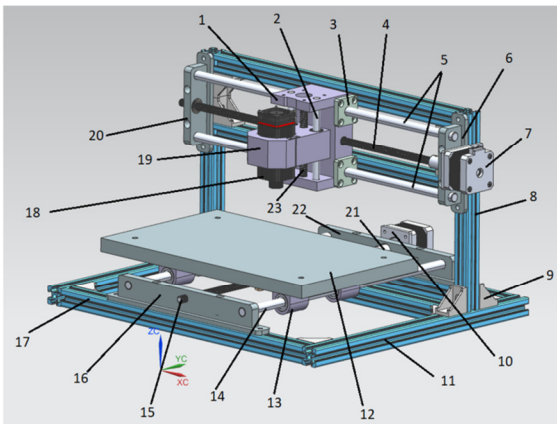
Main parts of laser cutting machine. (1) Laser hoder, (2) shaft $\phi 80 \times 80$ mm, (3) LMK10UU, (4) lead screw $\phi 8 \times 400$ mm, (5) shaft $\phi 10 \times 400$ mm, (6) X-axis holder, (7) Nema step motor, (8) aluminum bar $20 \times 20 \times 330$ mm, (9) L corner, (10) motor holder, (11) aluminum bar $20 \times 20 \times 330$ mm (11), (12) table, (13) LM10UU, (14) shaft $\phi 10 \times 330$ mm, (16) Y-axis holder, (17) aluminum bar $20 \times 20 \times 360$, (18) diode laser, (19) diode laser holder, (20) X-axis holder, (21) coupling, (22) Y-axis holder, (23) lead screw $\phi 8 \times 80$ mm.
